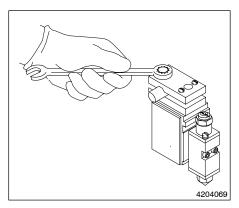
Loosening the Gun Retainer Hex Bolts
